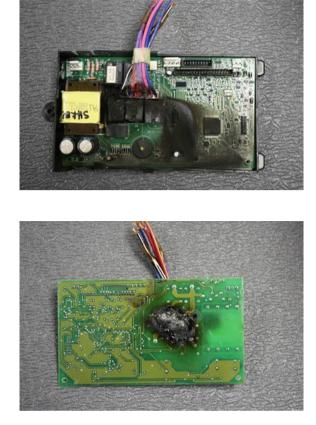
Bottom side of damaged PCB depicted in Fig. 3.1. Photo is courtesy of Foresite, Inc.
